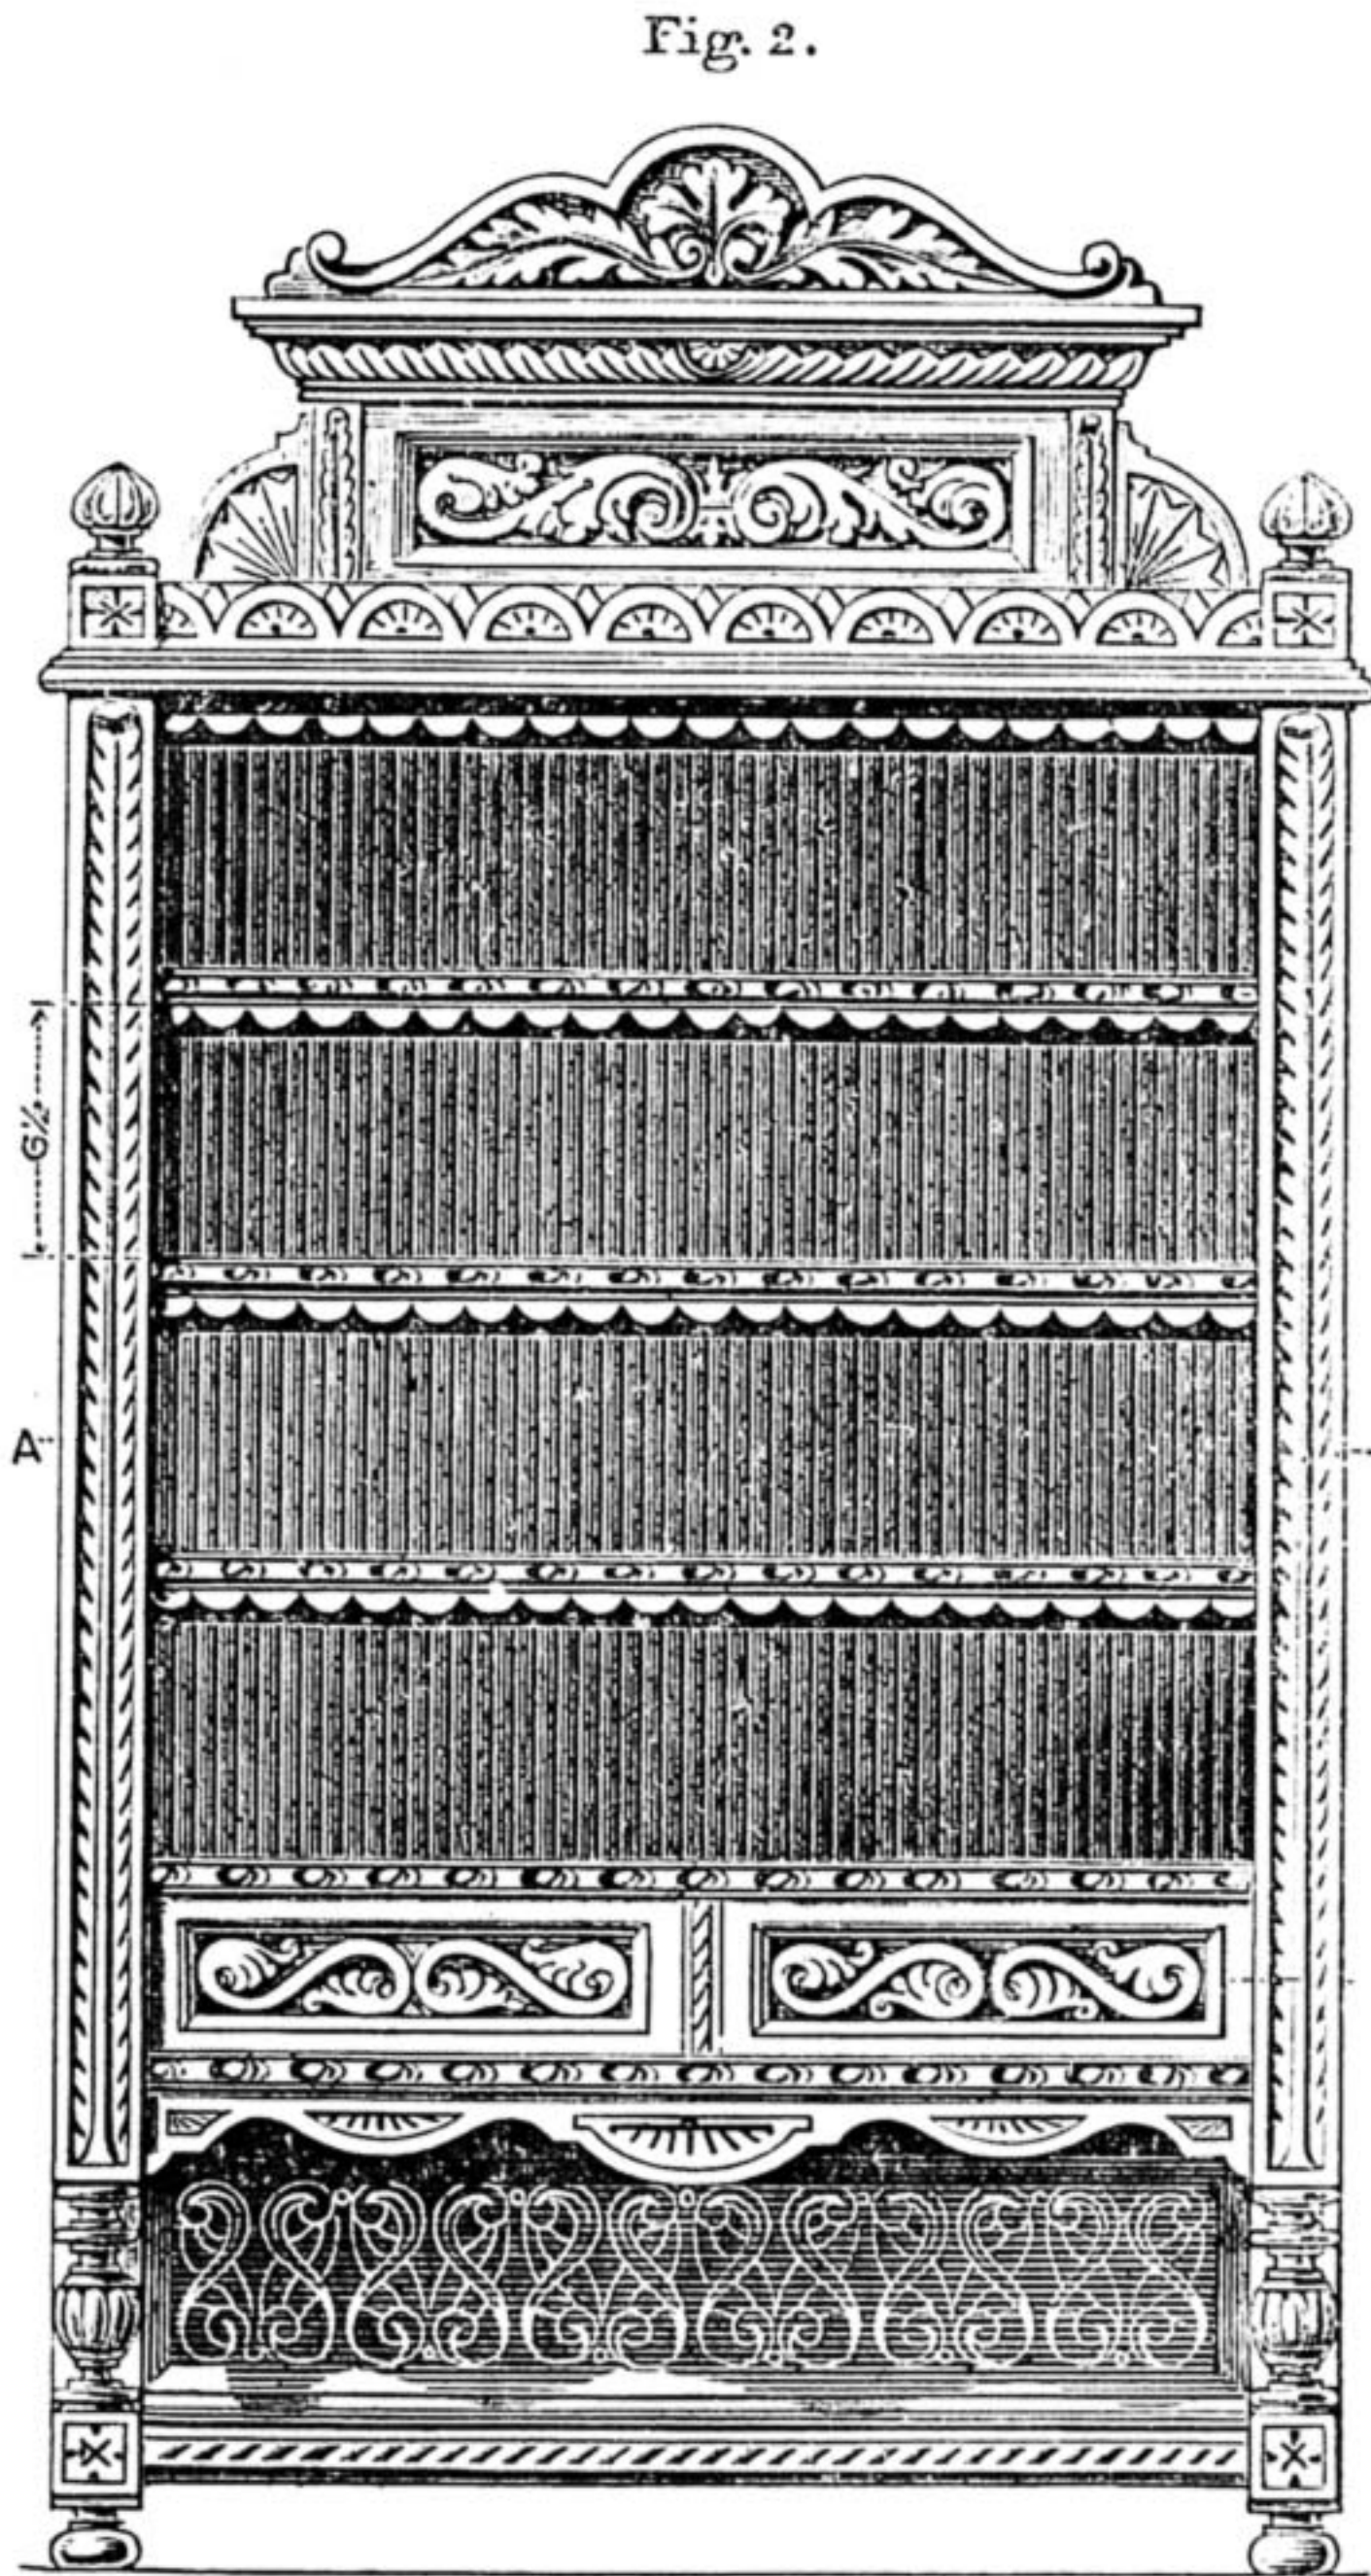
Front Elevation of Prize Bookshelves. Fig. 3.—Side Elevation. Fig. 4.—Details of Upper Part. Fig. 5.—Details of Pilaster at Foot. Fig. 6.—Rack for Shelves. (Scale, 1 in. to 1 ft.)
